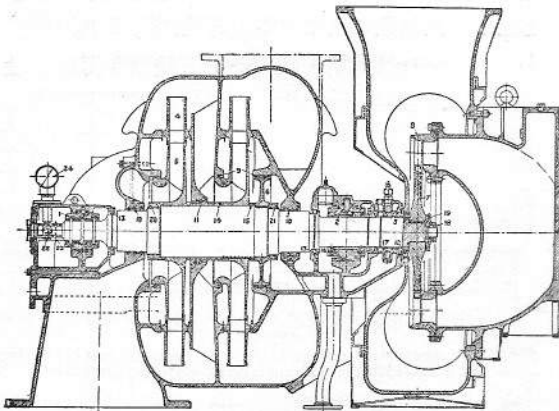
Sectional arrangement of exhaust-turbo blower.
